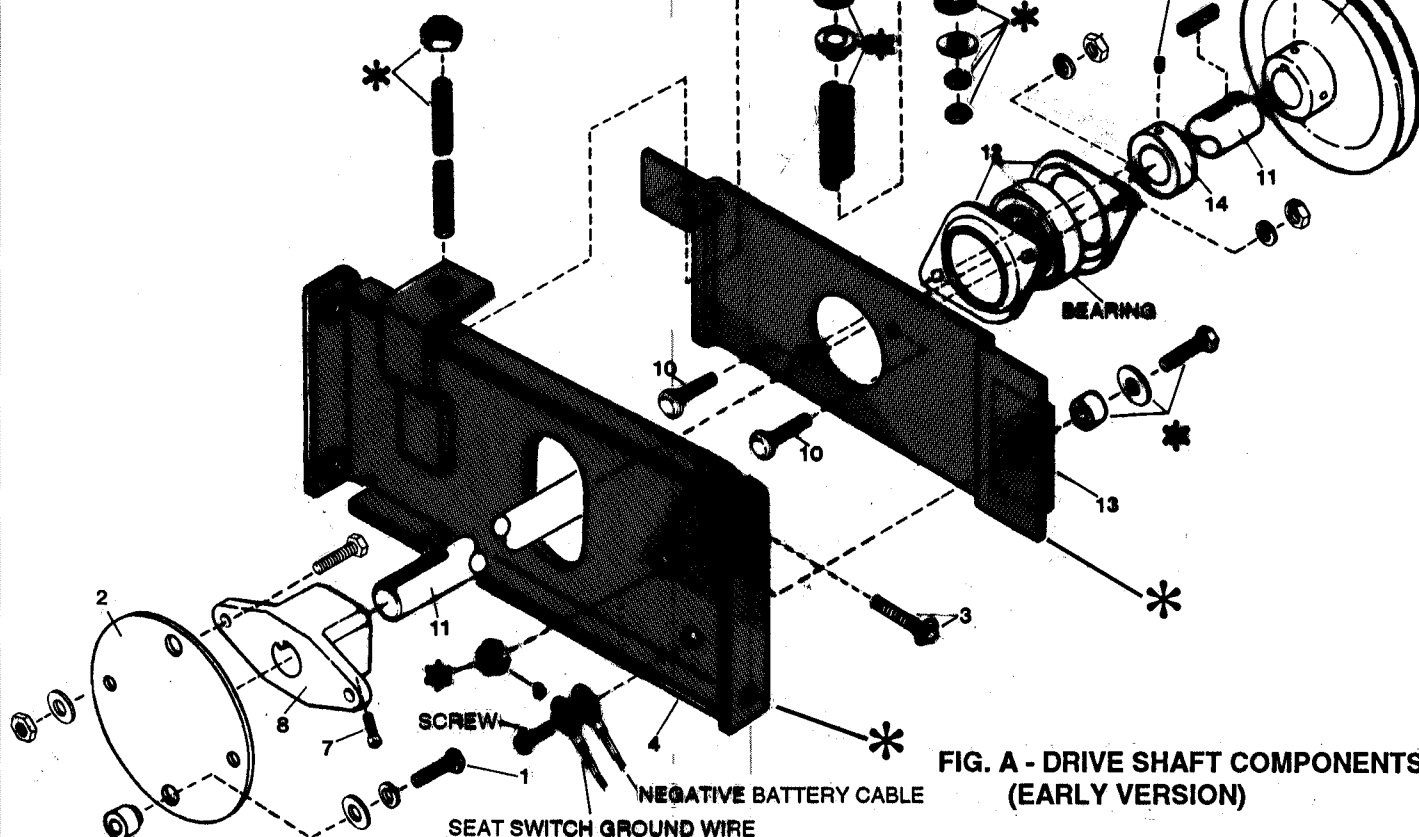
FIG. A - DRIVE SHAFT COMPONENTS (EARLY VERSION)
